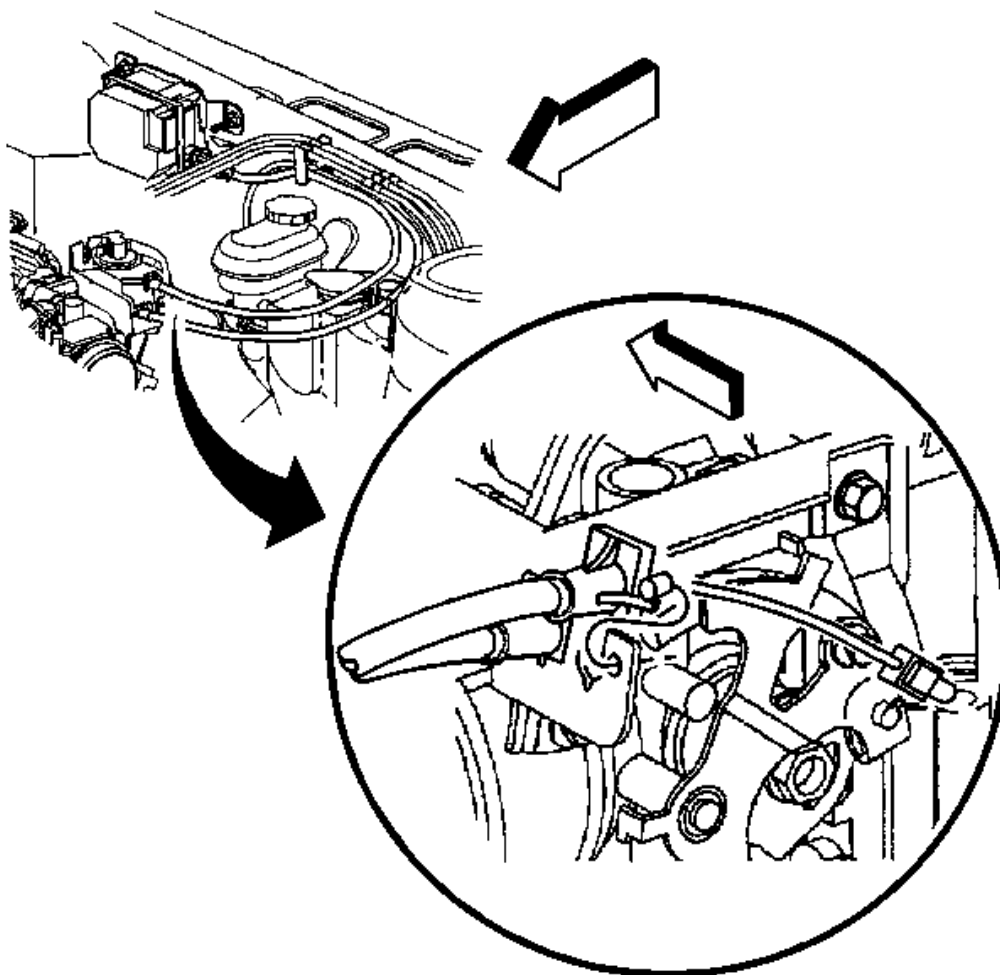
View of Cruise Control Module Electrical Connector & Cable
